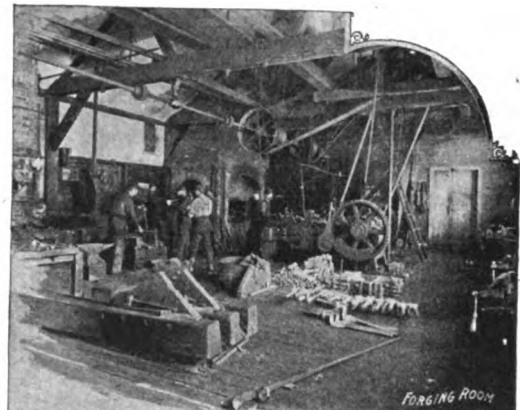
A WELL EQUIPPED FORGE SHOP FOR TURNING OUT AXLES.
